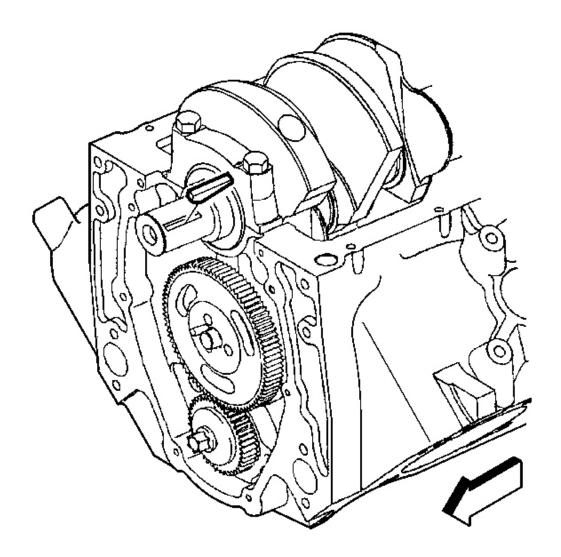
Locating Crankshaft Balancer Key Courtesy of GENERAL MOTORS CORP.
